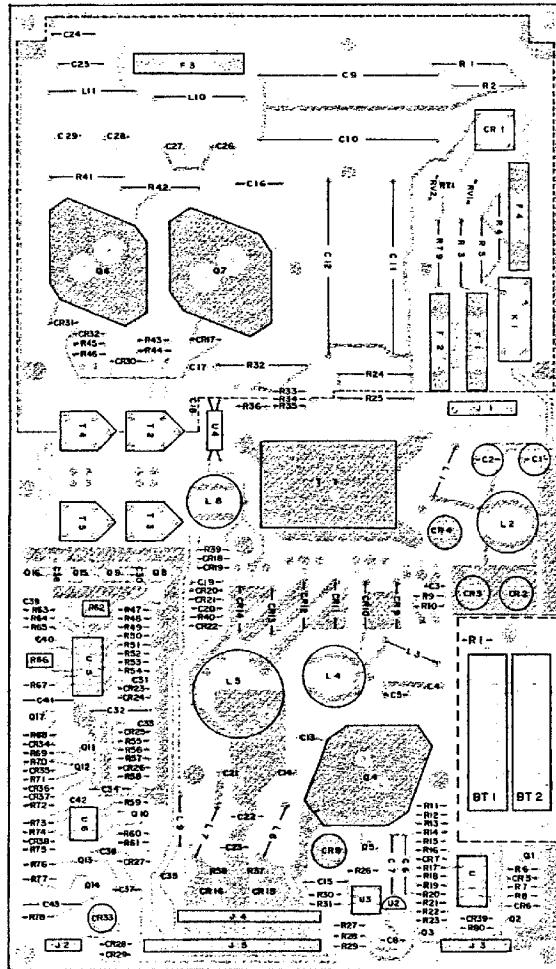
A7 Power Supply Board and A10 Battery and Charger Board Assembly Component Locations.
